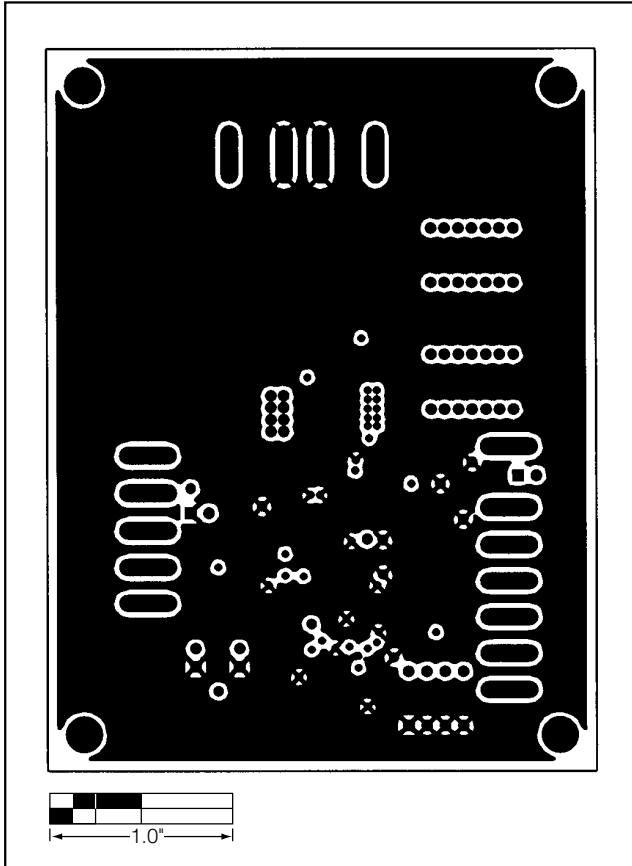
MAX1636 EV Kit PC Board Layout—Three Internal GND Planes
